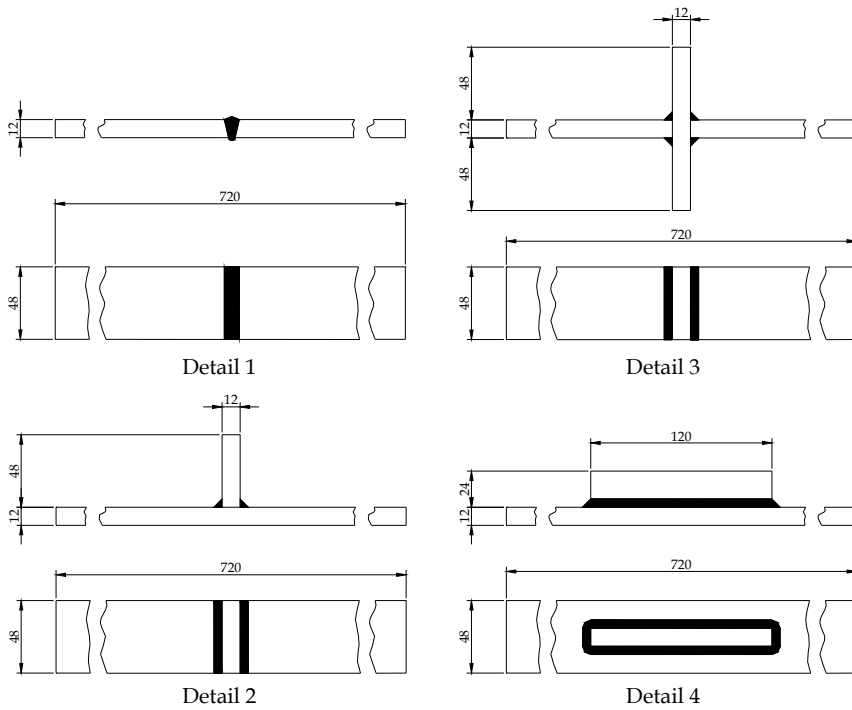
Welded joints made of 6061-T651 aluminium alloy (dimensions in mm)
